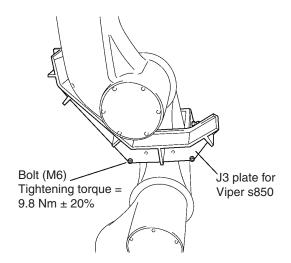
Joint 3 Hardstop Installation on Viper s850 (1)
